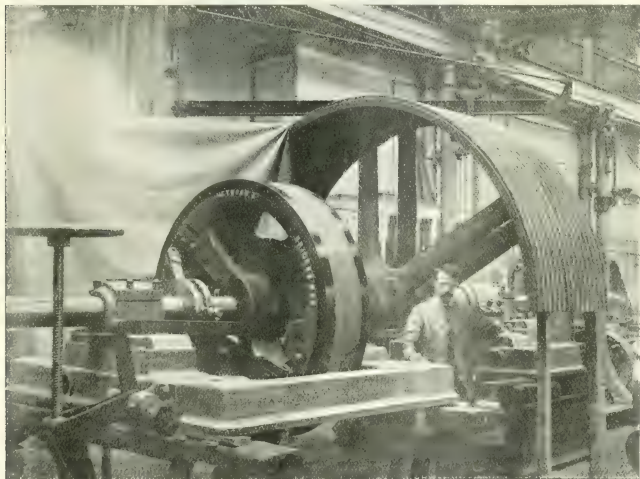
FRICTION CLUTCH USED WITH 400-H.P. MILL ENGINE.
